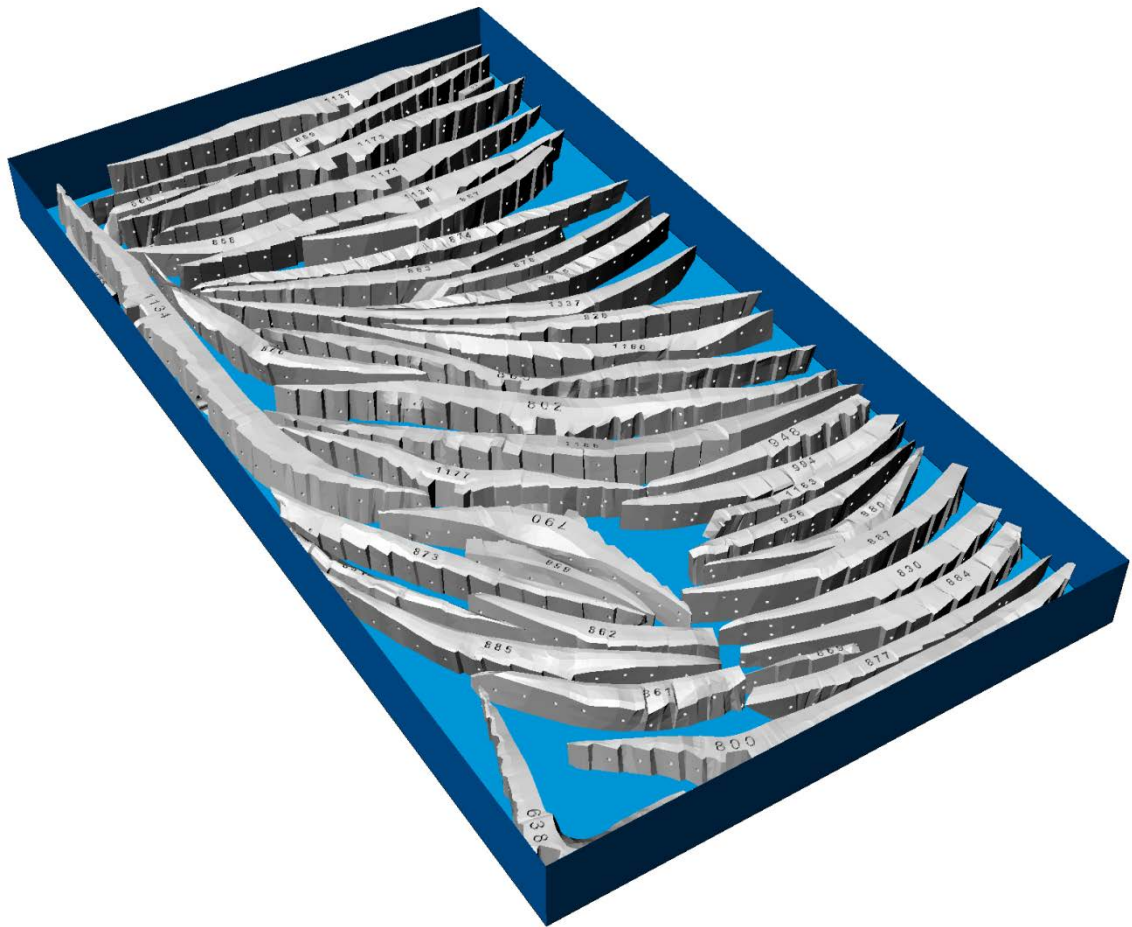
Typical layout of a layer of modelled ship timber models in the selective laser sintering machine. Each build comprised multiple layers of model pieces. Toby Jones.
